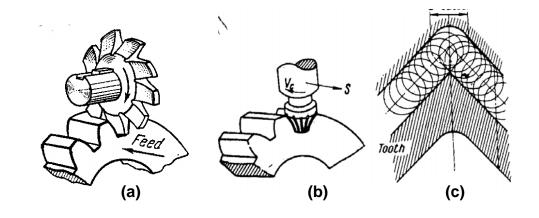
Producing external teeth by form milling cutters (a) disc type and end mill type for (b) single helical and (c) double helical teeth
